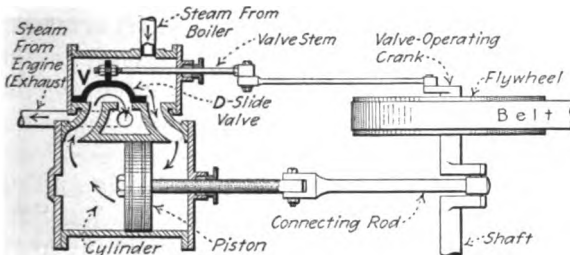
Section through cylinder of an engine which has a slide valve.
